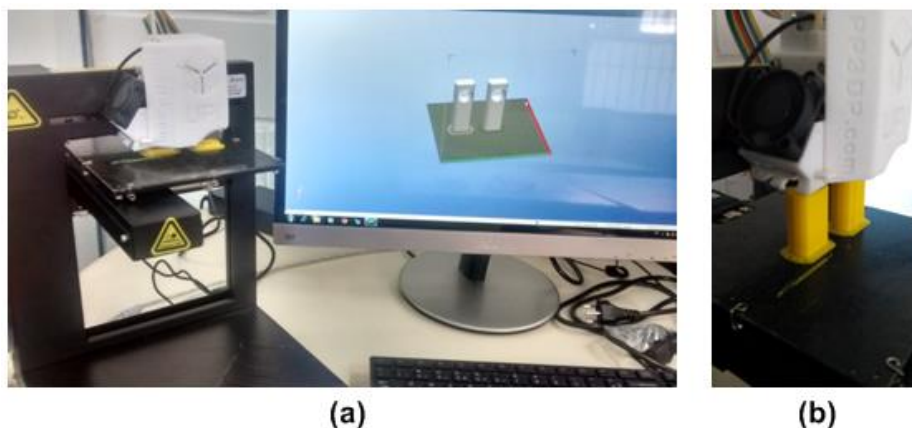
(a) Equipment used in the printing process; (b) Printer working.
